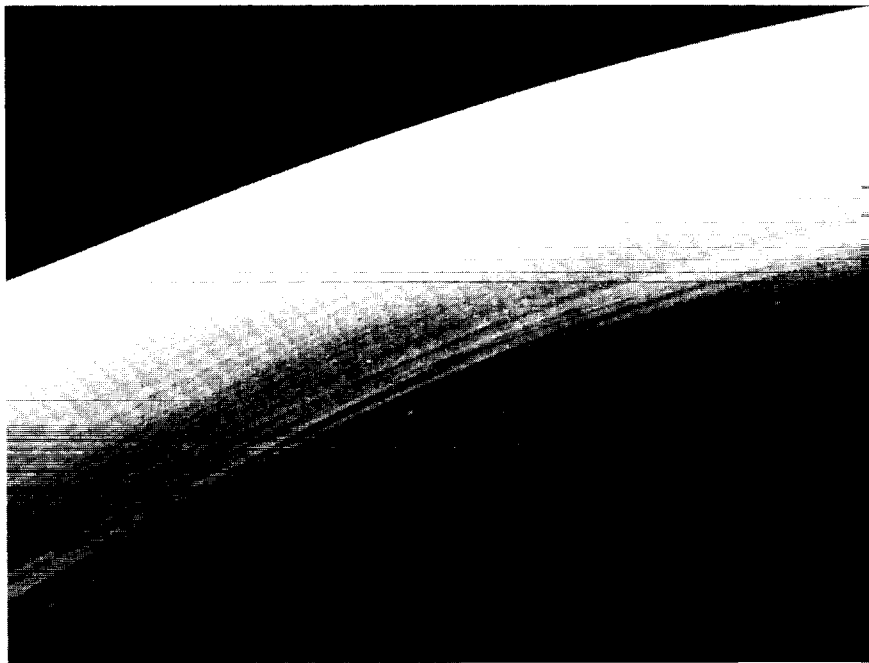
SEM of surface of spherical copper test piece machined in our precision air bearing, SPDT machine.
